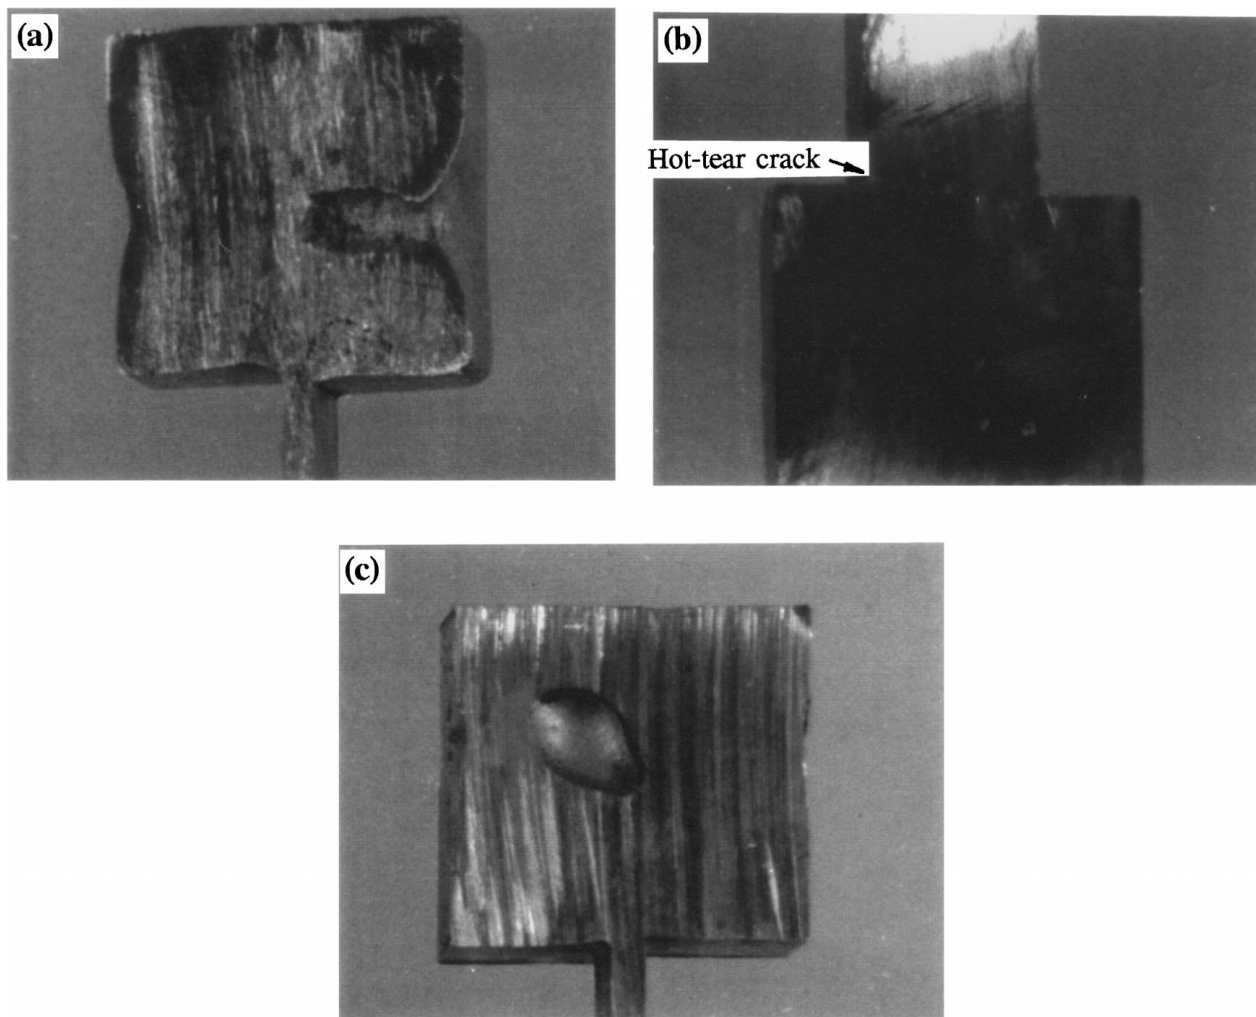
Casting defects; (a) shrinkage porosity in the end section of gravity cast 7050 alloy with a middle section thickness of 2 mm, (b) hot-tear cracks where the middle section joins the base section in gravity cast 7050 alloy with a middle section thickness of 10 mm, and (c) shrinkage porosity in the end section of squeeze cast 7050 alloy with a middle section thickness of 2 mm.
